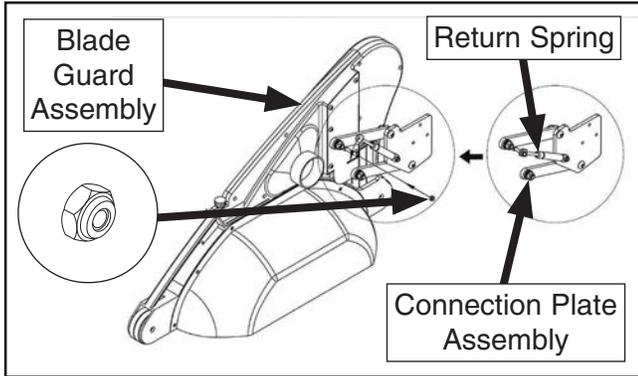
Installing blade guard connection plate assembly onto blade guard assembly.
